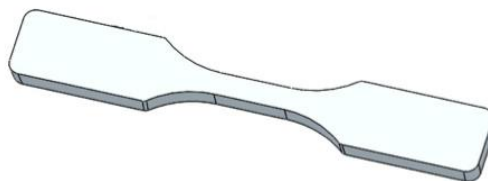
Tensile test bar (middle section) gauge length 45 mm.
